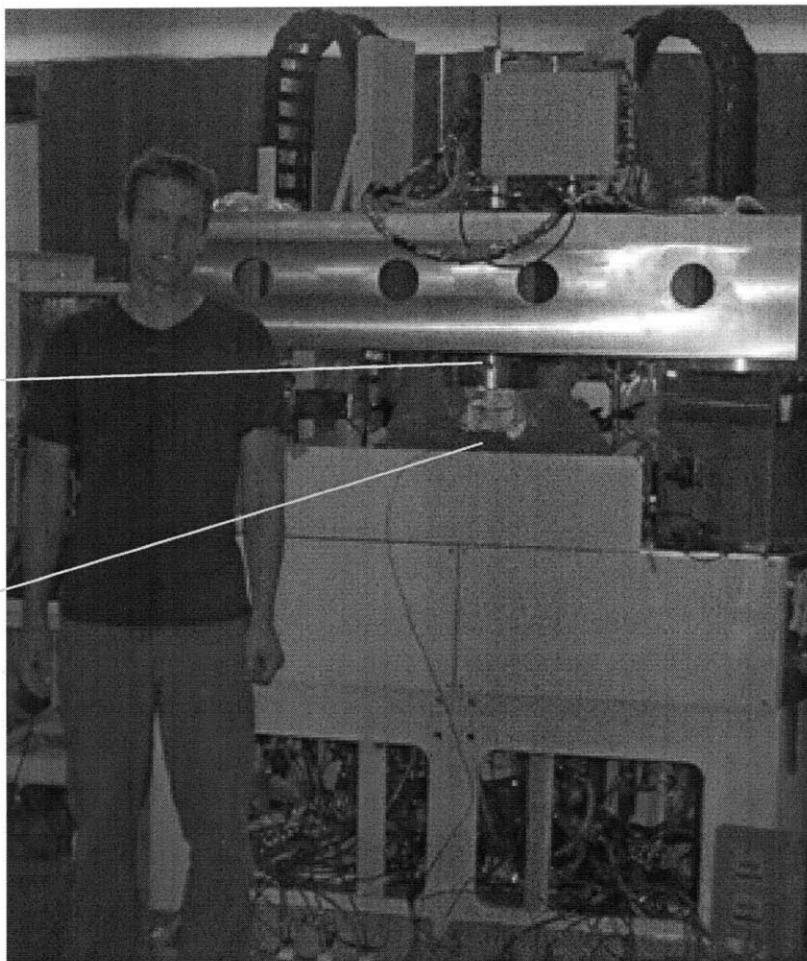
grinding machine prototype without wheel spindle in open configuration
